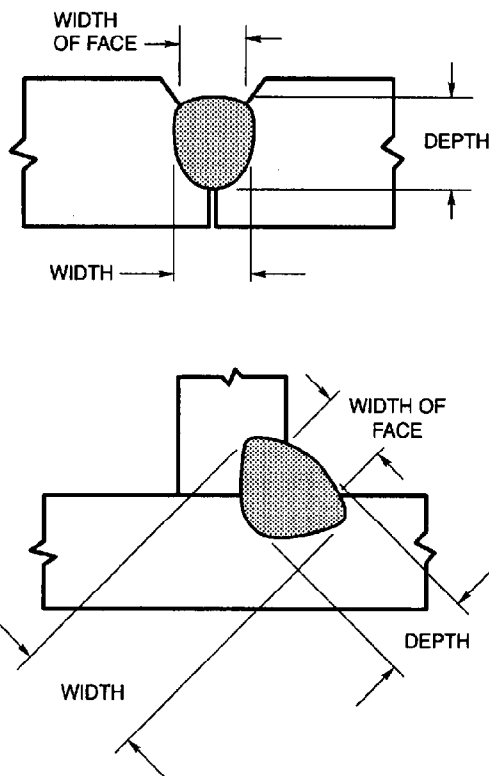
Weld Bead in which Depth and Width Exceed the Width of the Weld Face (see 3.7.2)
